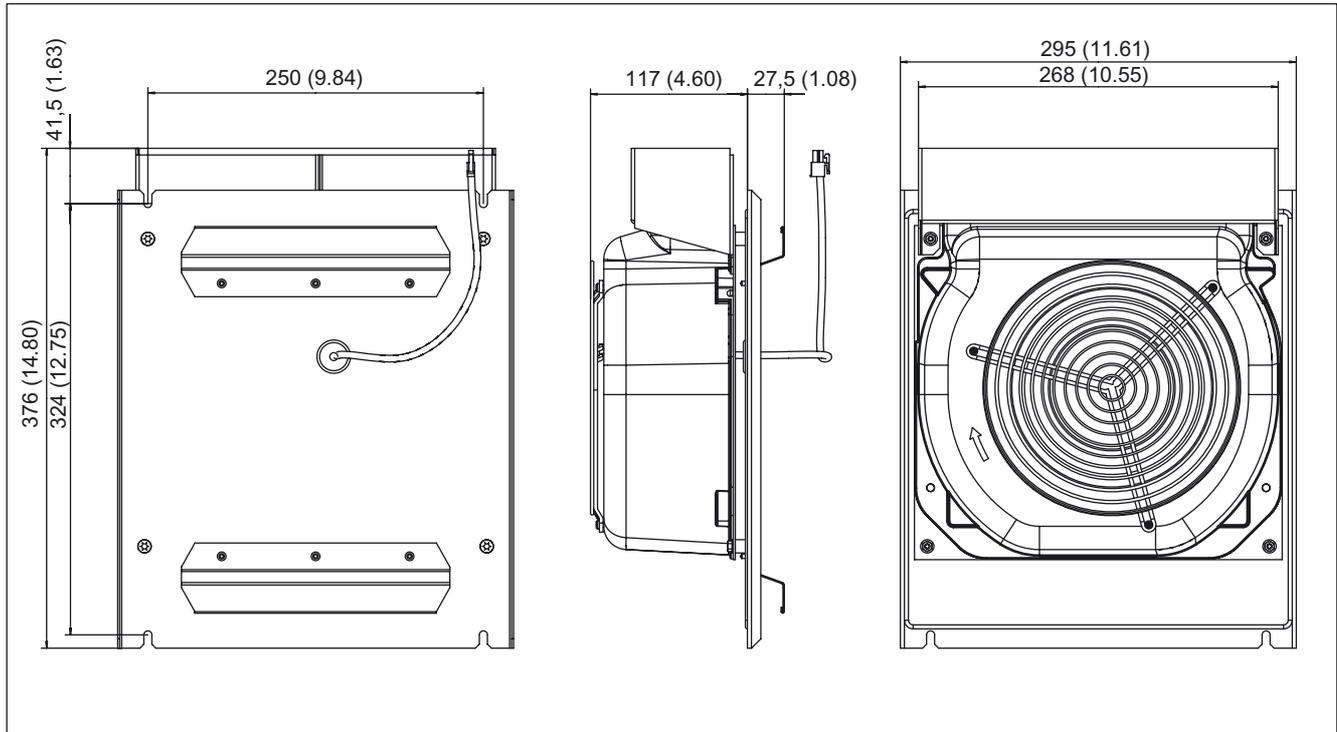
Dimension drawing of Fans for Motor Modules with external air cooling 132 A and 200 A, all dimensions in mm and (inches)
